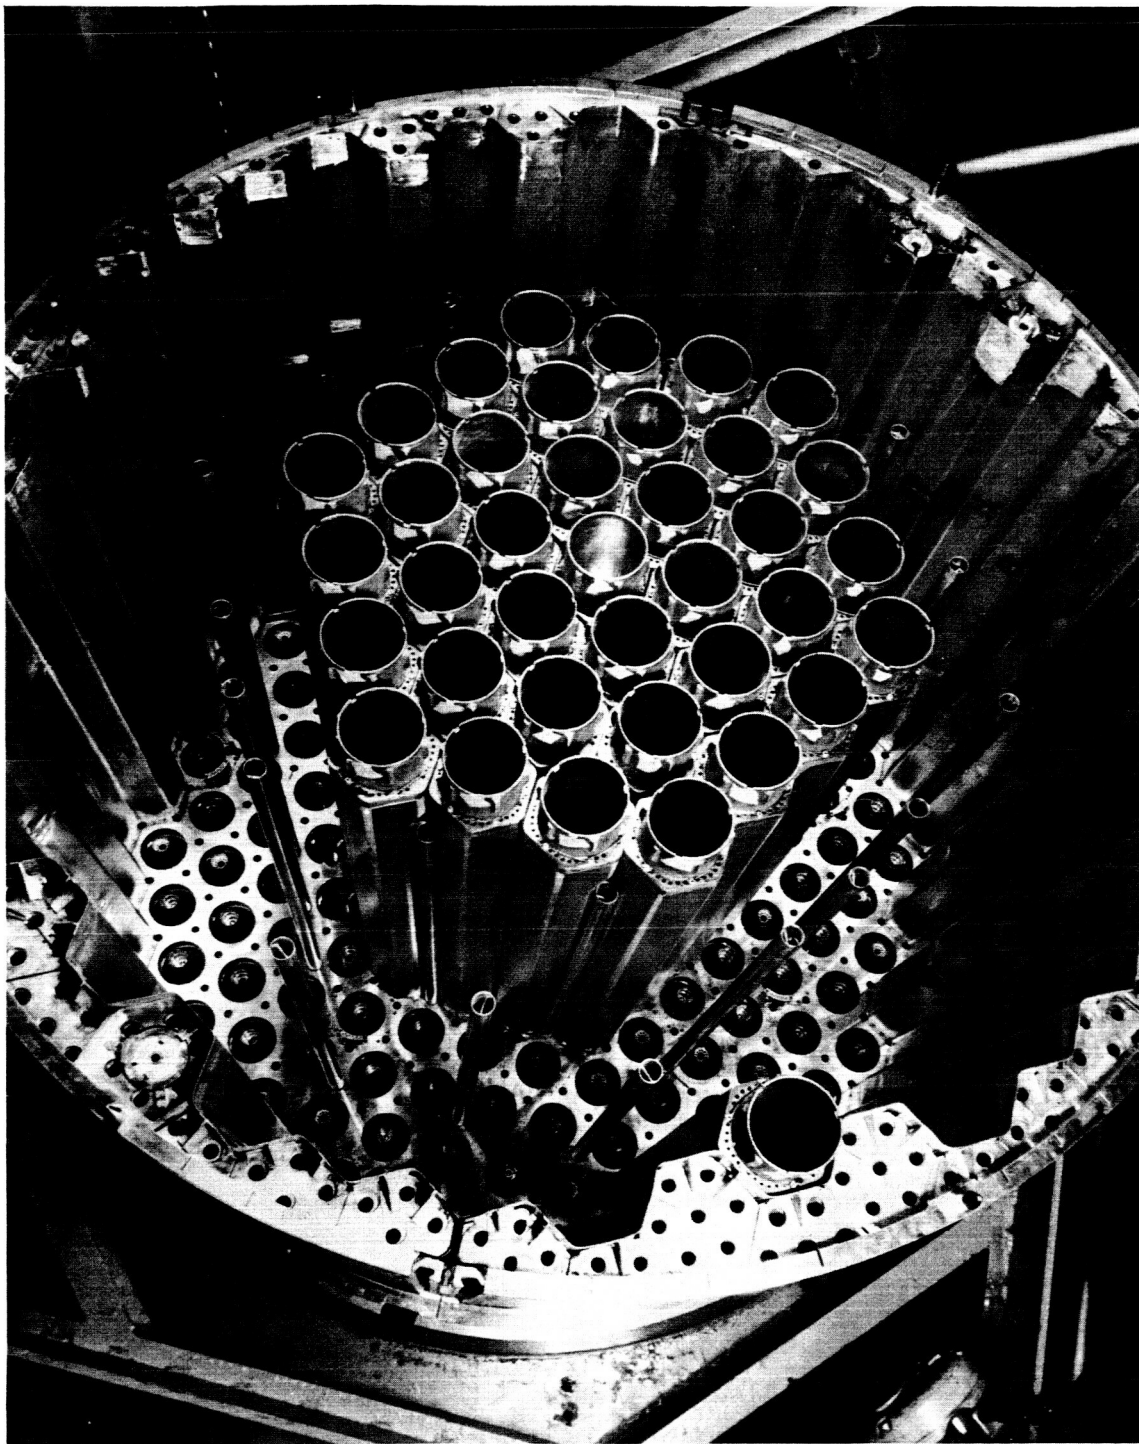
HTRE-3 reactor during assembly (C-13822)
